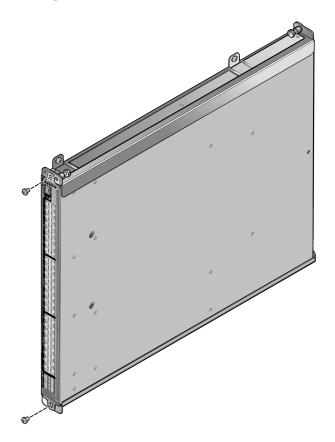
Securing the SSA Chassis to the Mounting Bracket
